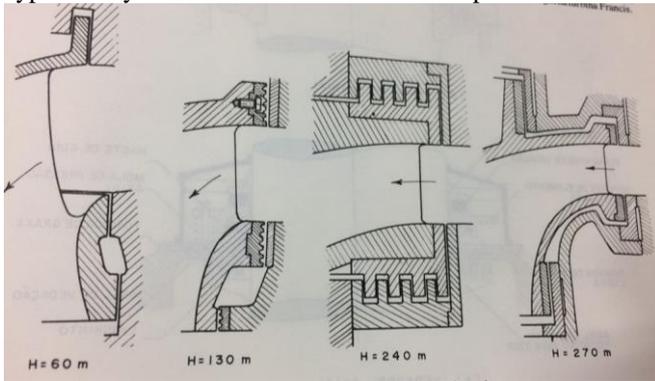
Rotor sealing gaskets and Francis turbine housing for different heads (H). [6]
